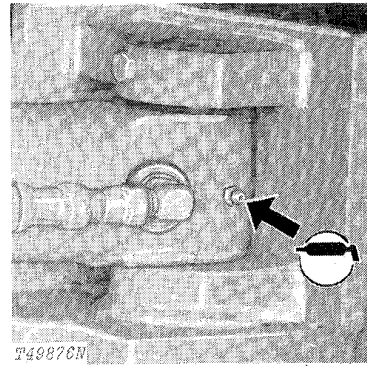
Feed Roll Cylinder Head End (1 Point)
